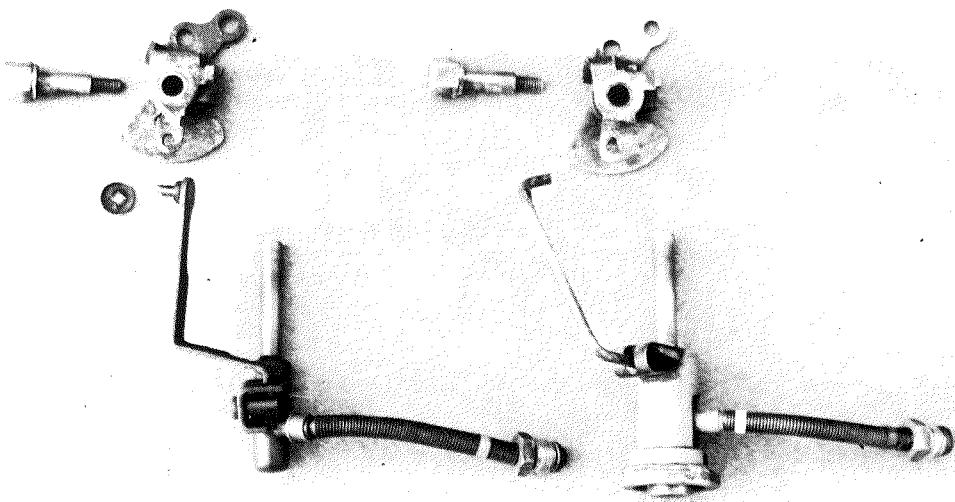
Parts involved in the waxstat to fixed jet conversion
